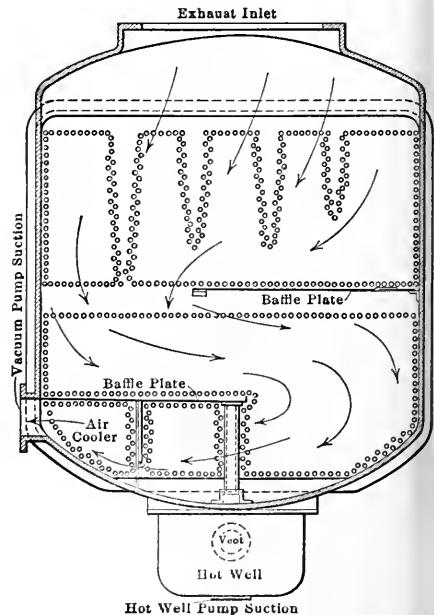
WORTHINGTON IMPROVED TUBE PLATE
